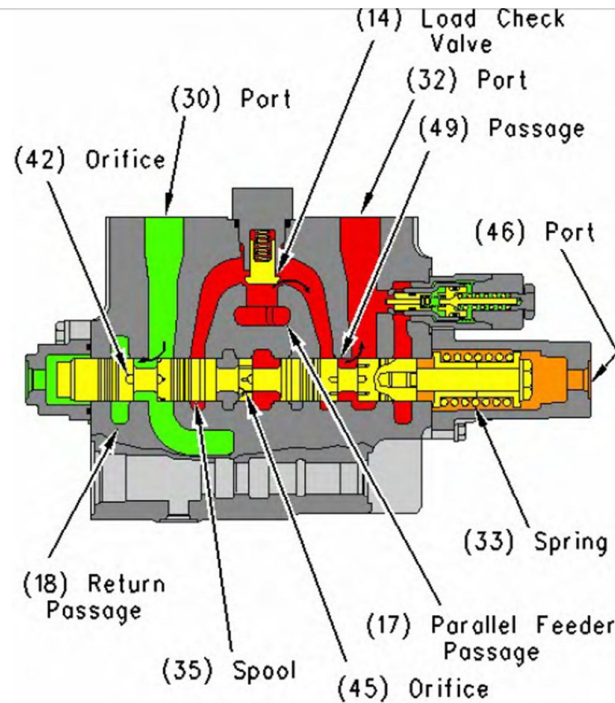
Boom I Control Valve (Boom Lower Position)
